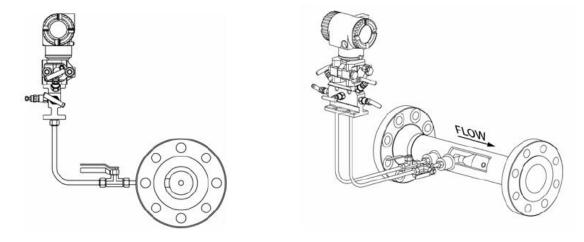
Piping installation for dry gas measurement with a horizontal meter
